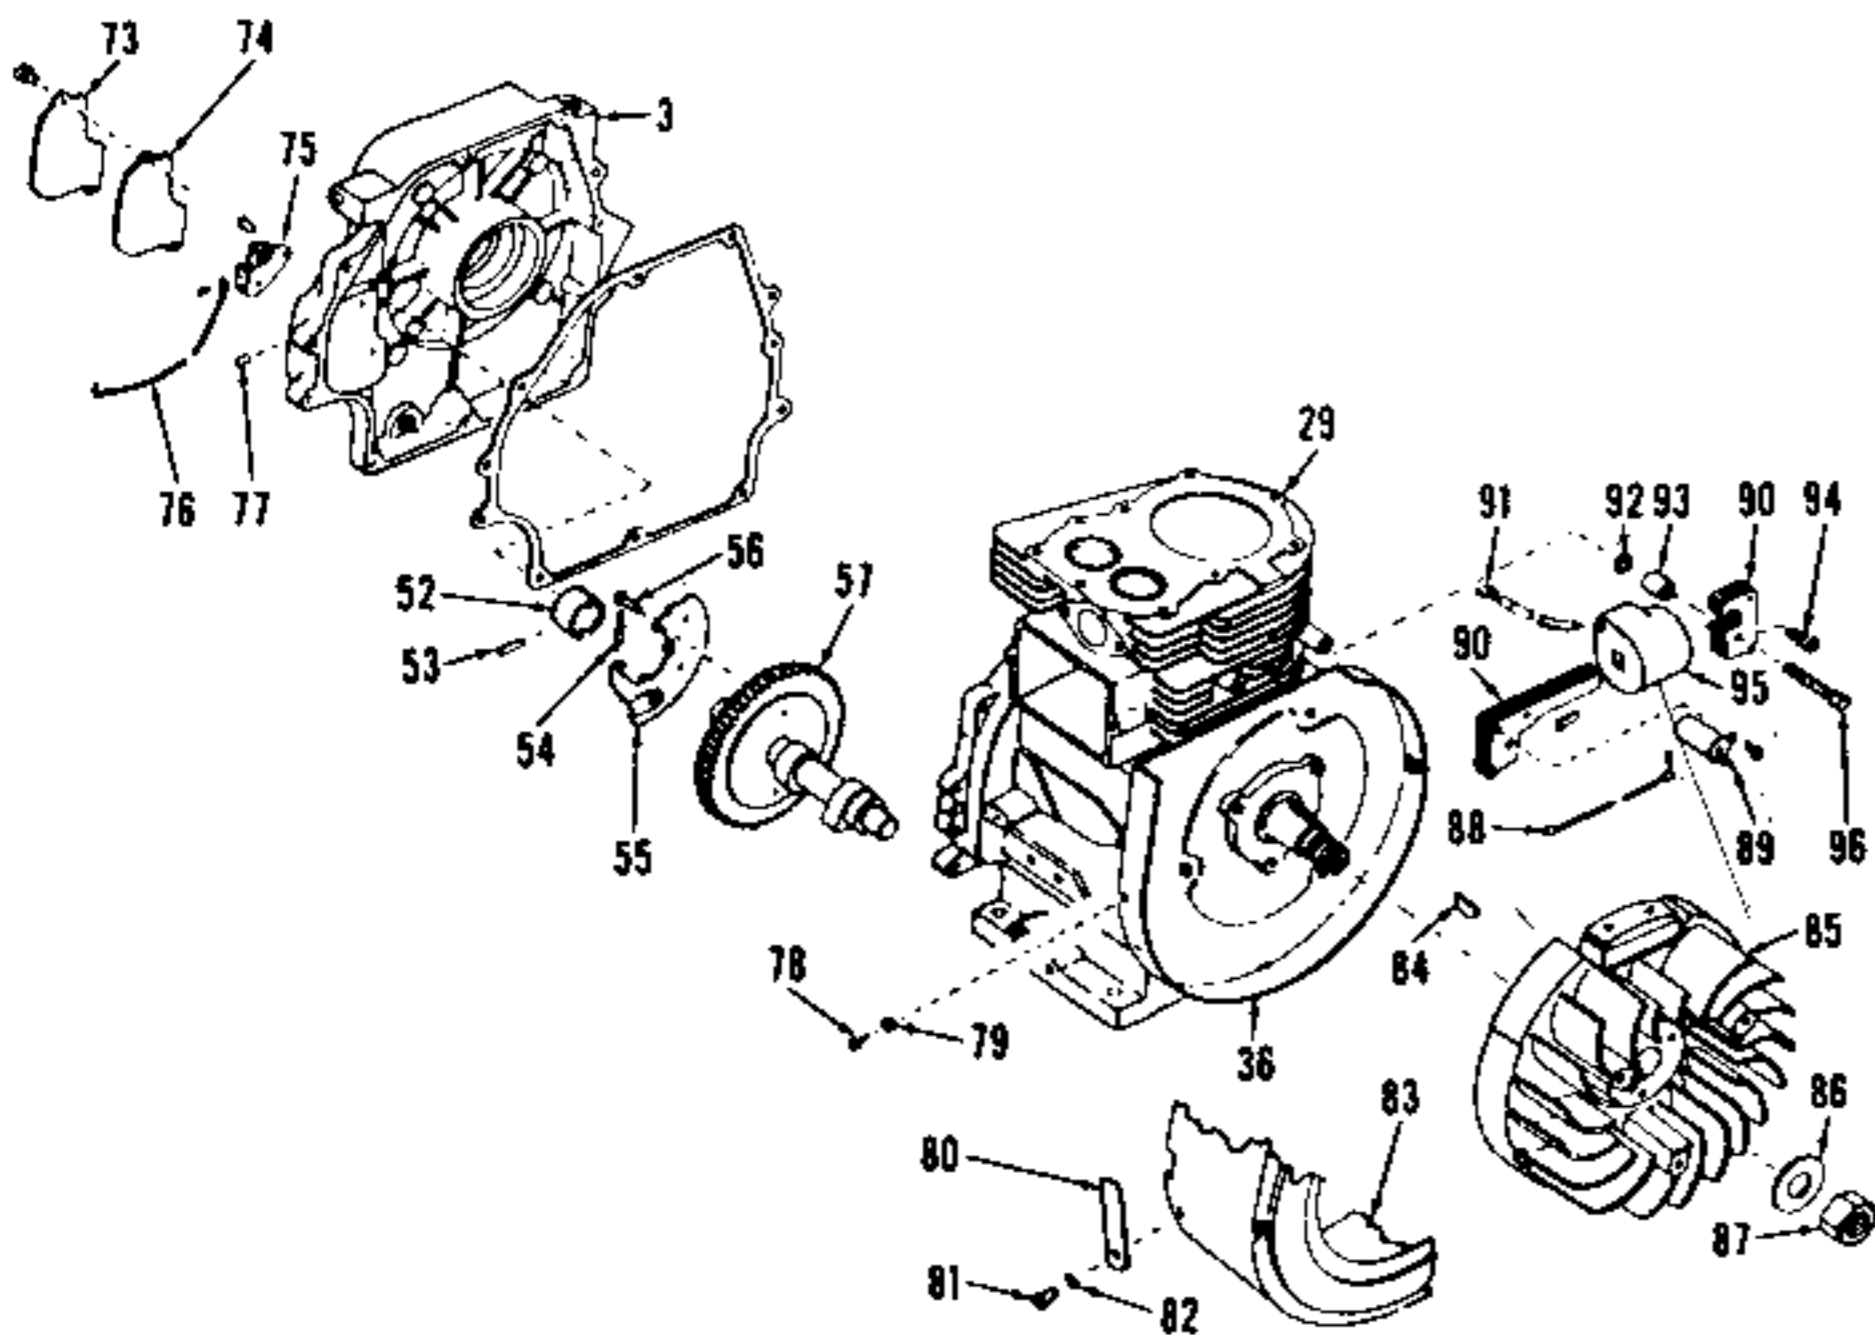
Exploded view of magneto ignition components used on Models HH80, HH100 and HH120. Timing advance and breaker points used on engines equipped with battery ignition are identical.
